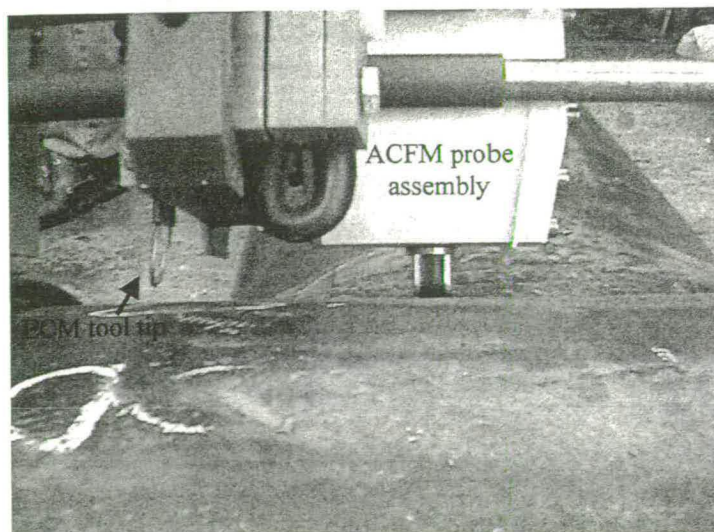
Close-up of ECM tool (in retracted position) and ACFM probe (in deployed position) aligned at the weld toe.
